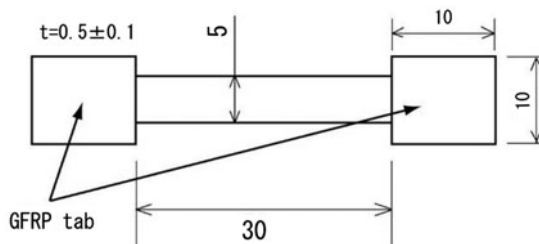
Schematic drawing of tensile specimen (dimensions are in mm).
